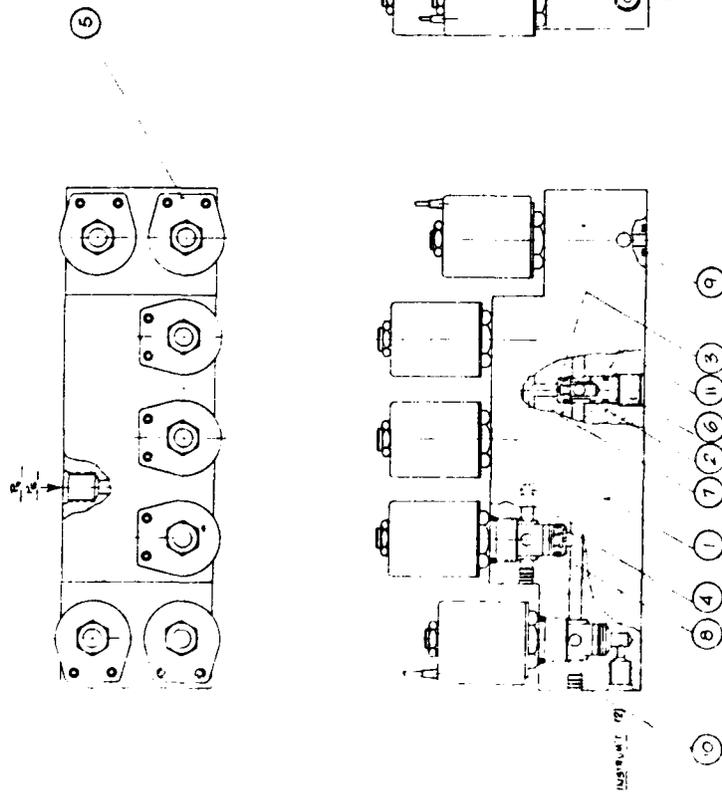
is an assembly drawing of the servovalve manifold, solenoid valves and the flow modulation orifices making up the digital servovalve.
